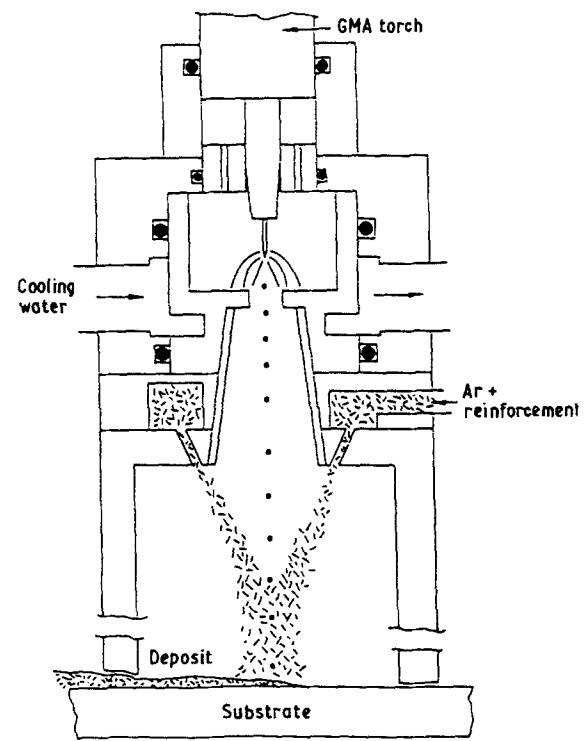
Schematic drawing of modified gas metal arc welding deposition process [38].
